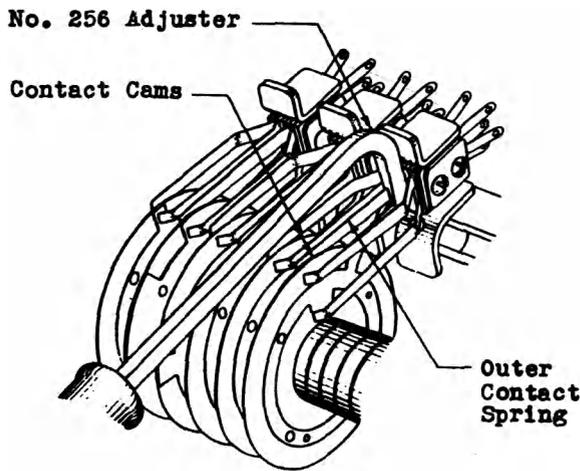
Method of Using the No. 256 Adjuster in Adjusting Outer Contact Springs
